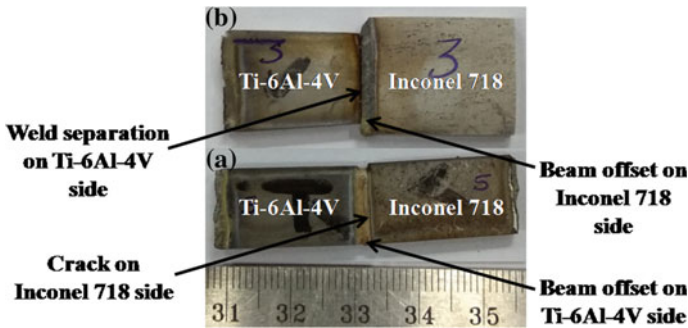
Image of laser beam welded sample when beam is offset on a Ti6Al4V side and b Inconel 718 side
